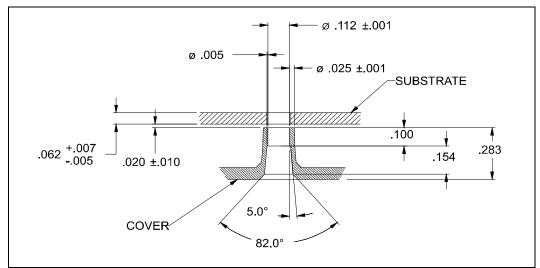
S.E.C.C.2 Packaged Processor Assembly — Heat Sink Attach Boss Section
